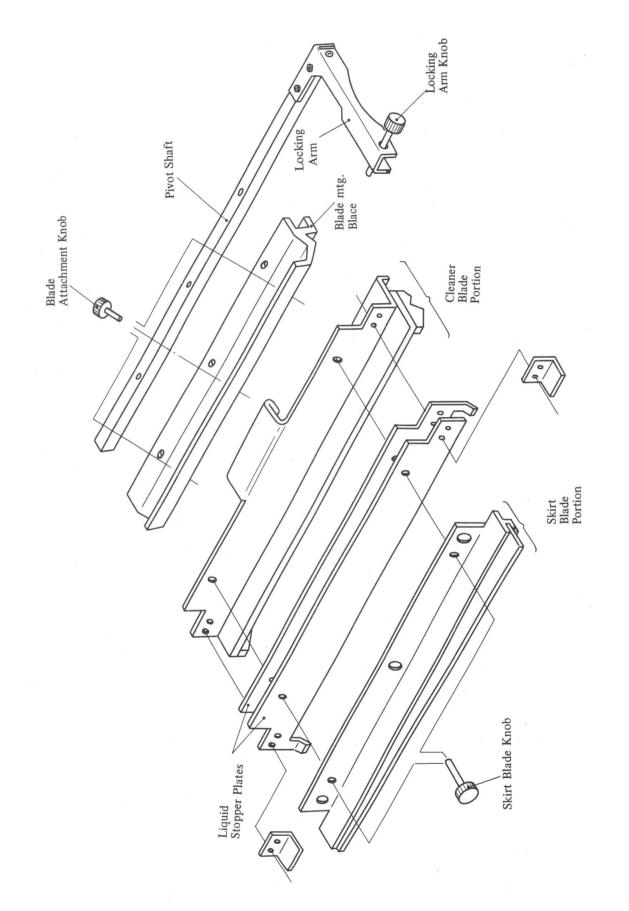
Drum Cleaner Assembly Main Components (Exploded View)
